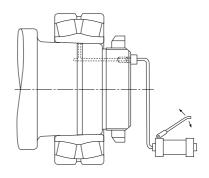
Removal Using Oil Injection Hydraulic Pump
